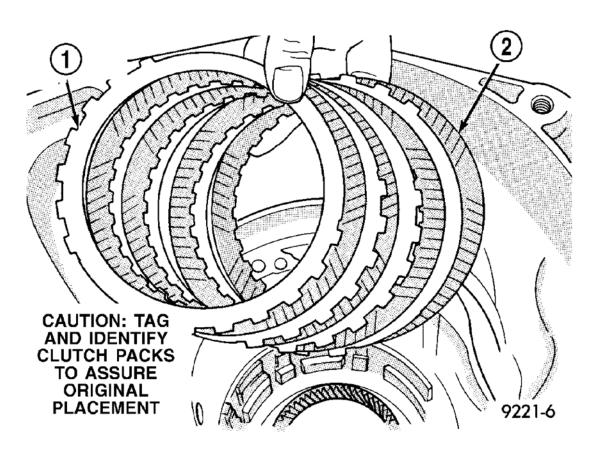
Installing 2/4 Clutch Pack Courtesy of CHRYSLER LLC
